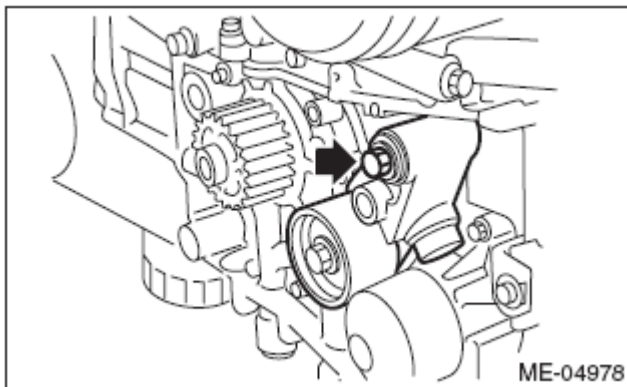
Pushing Adjuster Rod With Pressure Of 165 N
